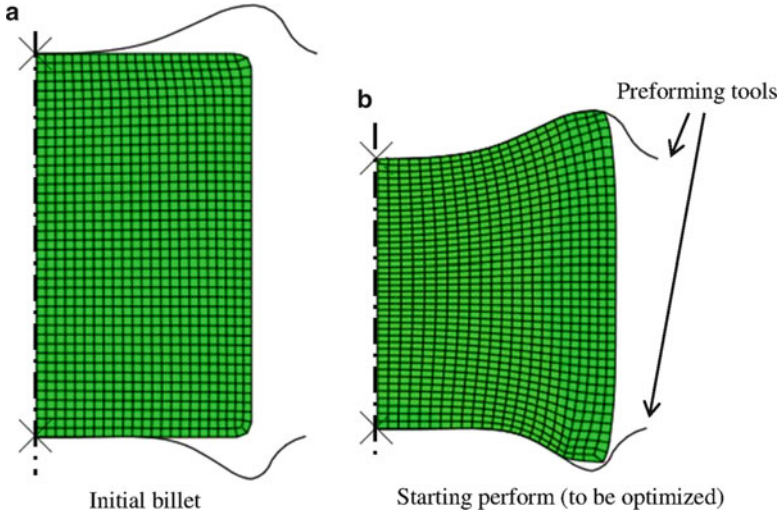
Preforming stage using starting tool preform. (a) Initial billet. (b) Starting tool preform (to be optimized)
